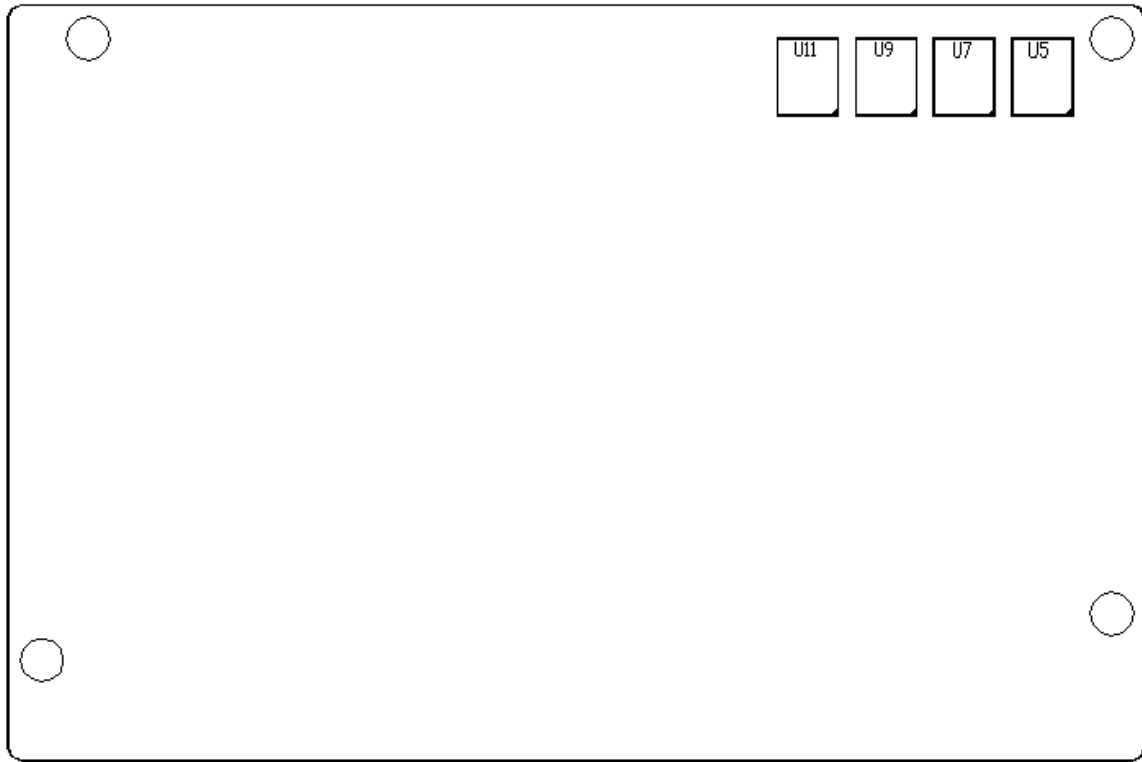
Jumpers and Connectors Location_ Board Bottom
